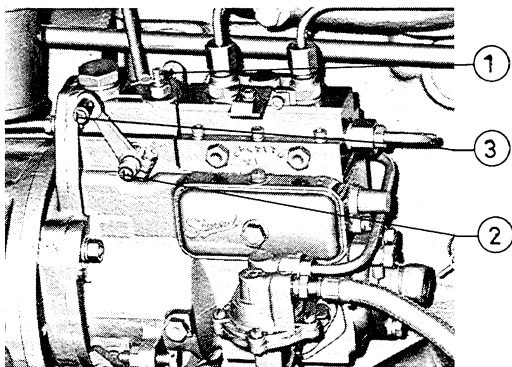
1 Governor lever (mounted between the injection pump and the engine block)
